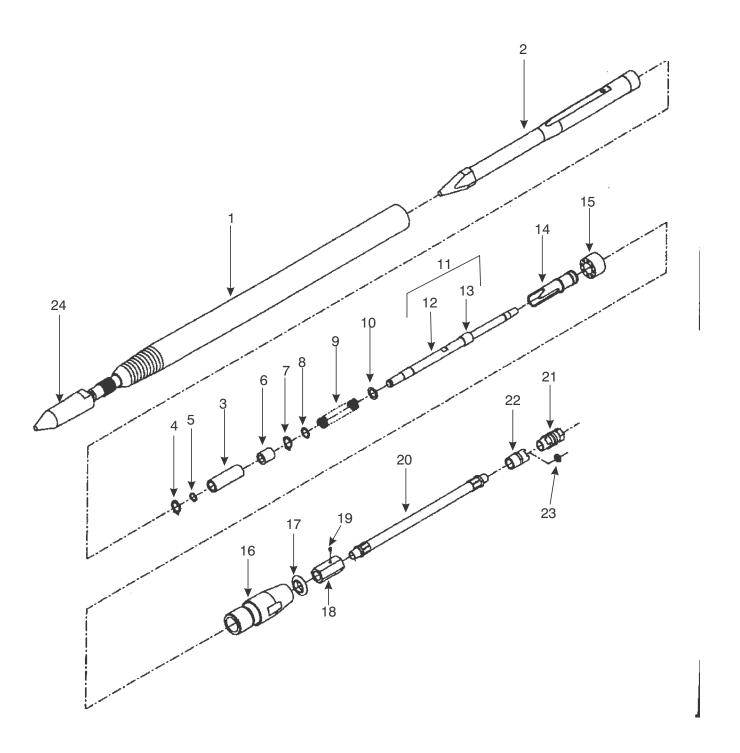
Model 1000C-TH Hole-Hog Complete Assembly
